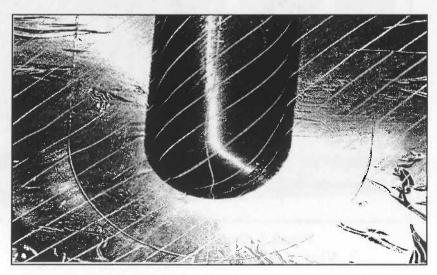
Bottom view of the quasi-isotropic APC2-AS4 part formed without blankholder.
